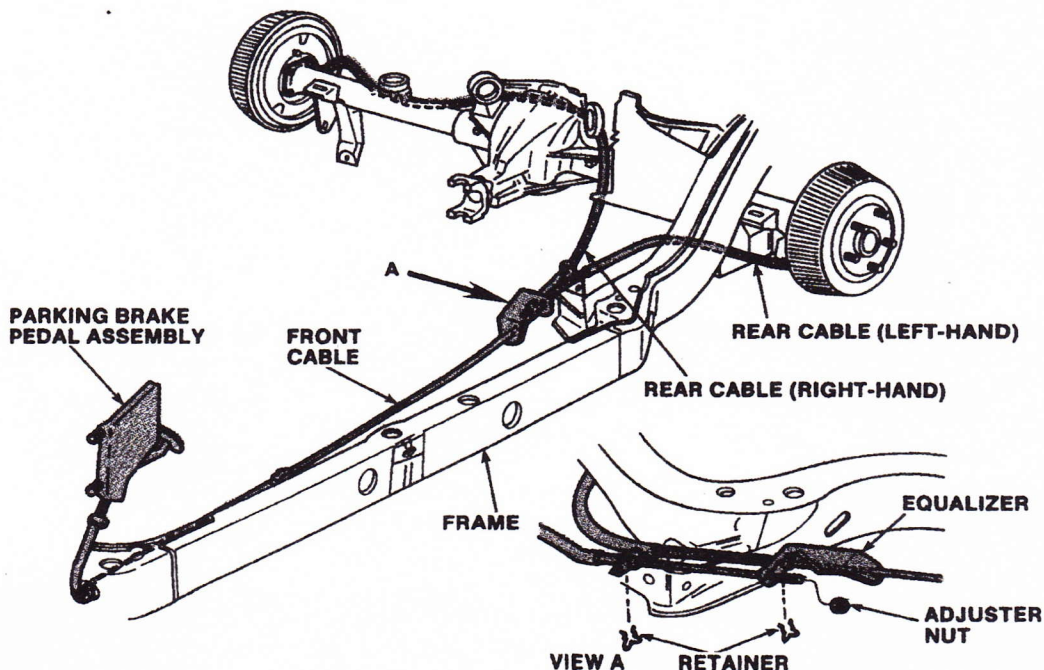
Typical parking brake routing to the rear drum brakes.
